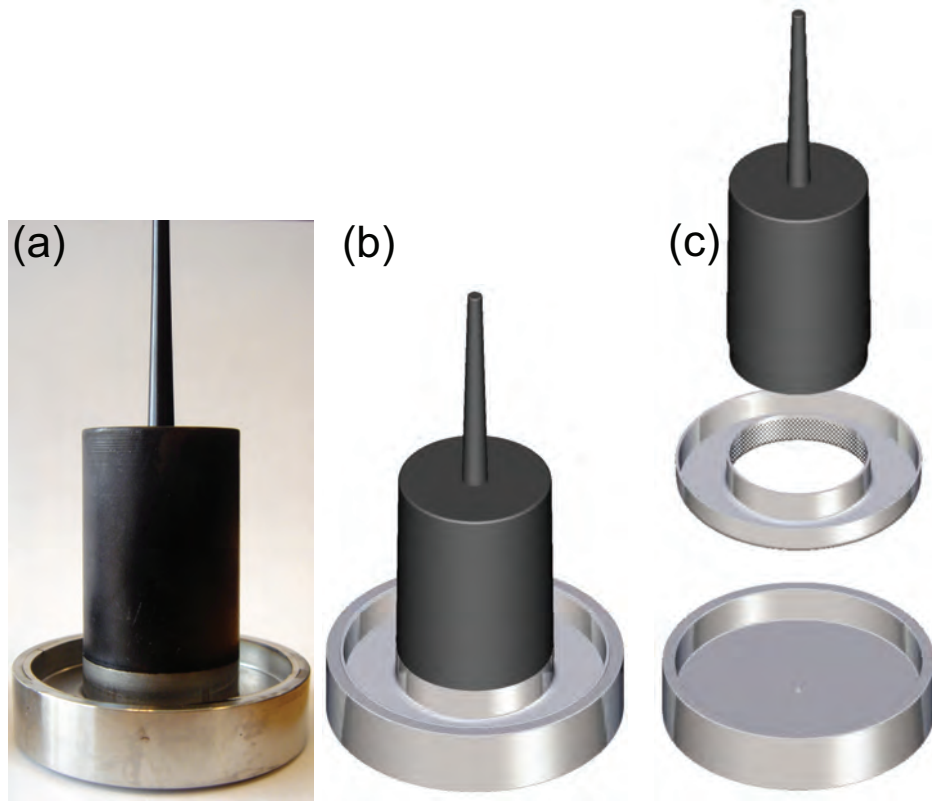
(a) Photograph of a sample used for testing the permeability of the MMI joint. The bright part is stainless steel and the black part is plastic (b) CAD drawing of the sample. (c) Exploded view of the sample. The checkered region, on the inner side of the metal ring, represents the laser structured area. The metal ring has a height of 8 mm and an inner diameter of 27 mm
